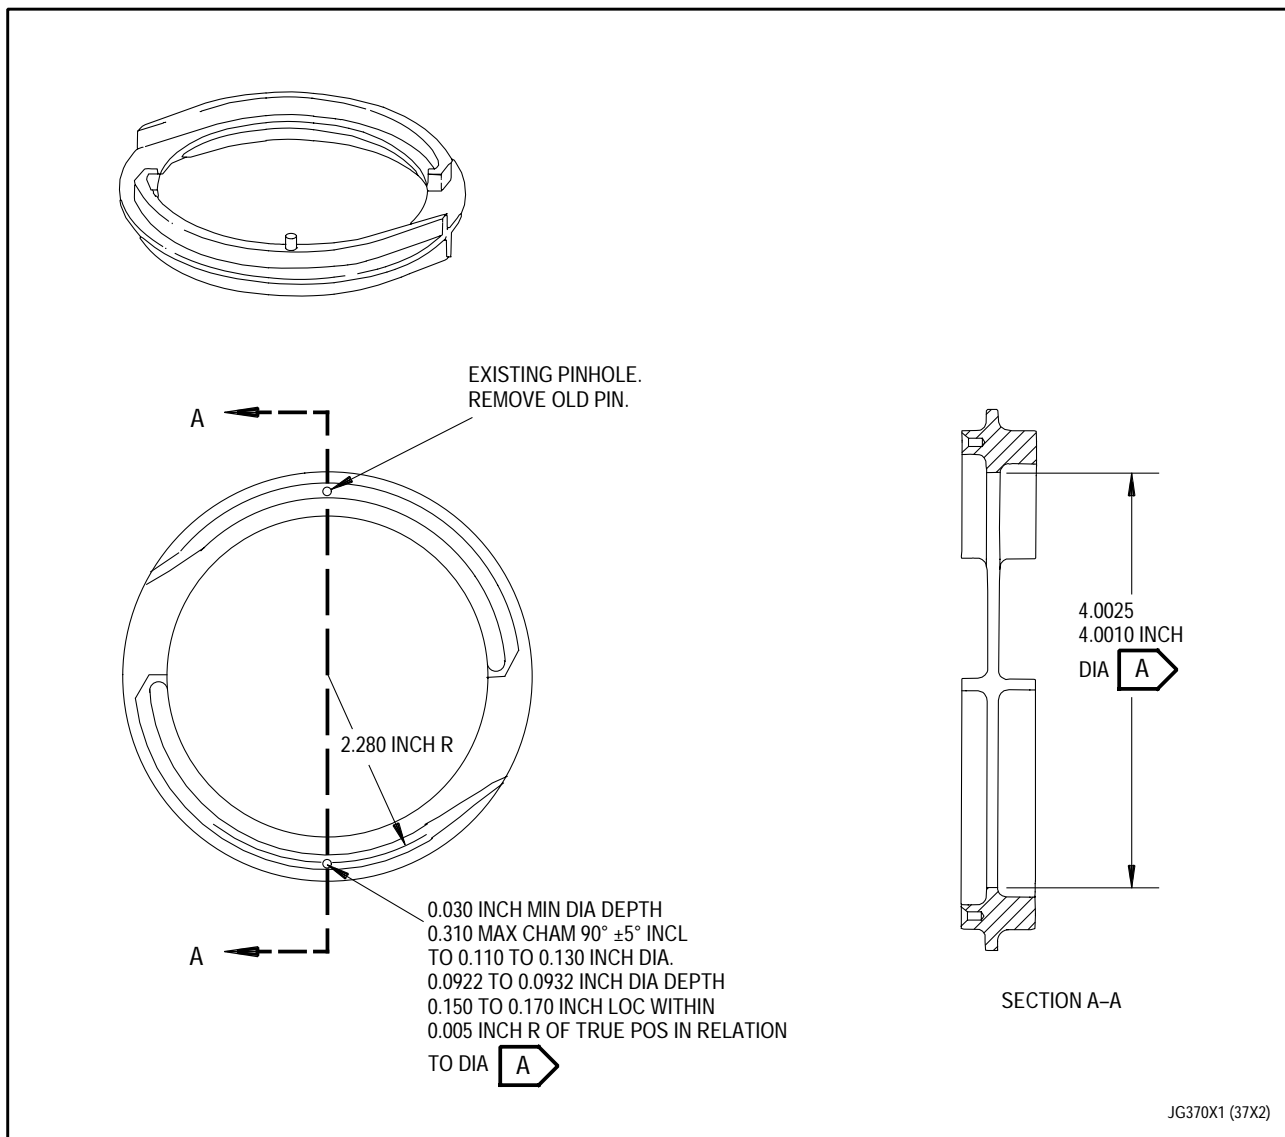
No. 2 Bearing Front Scoop Assembly - Machining New Pinhole
